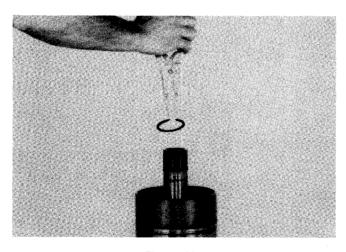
Position return spring retainer ring on clutch shaft. Compress disc springs and install retainer ring.
